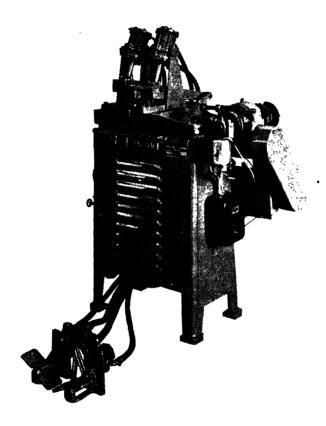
A butt welder (Courtesy of: National Electric Welding Machines Company)
